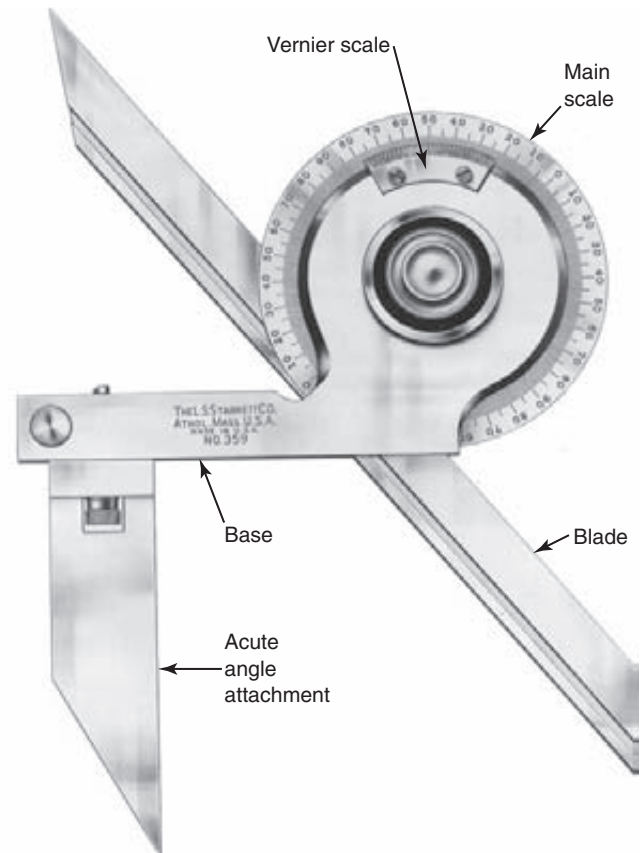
Parts of the universal bevel vernier protractor (Courtesy of The L.S. Starrett Co.).
